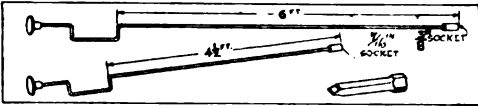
Six-foot 3/8-in. socket wrench for universal flanges
